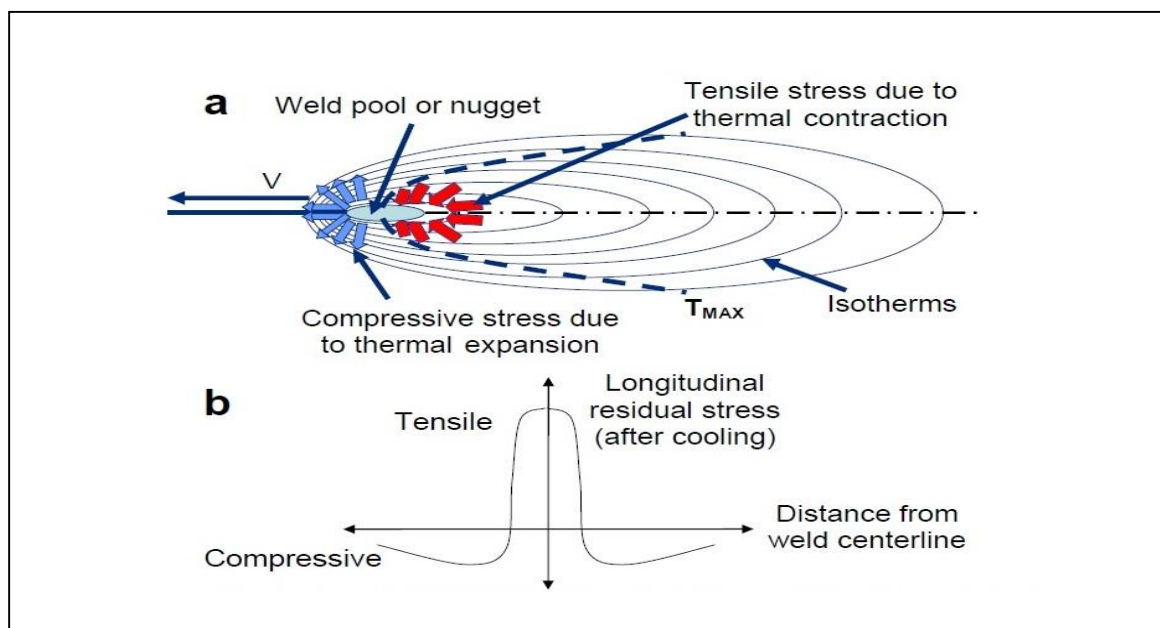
Stress in welds (a) thermal stress during & (b) residual stress after welding.
